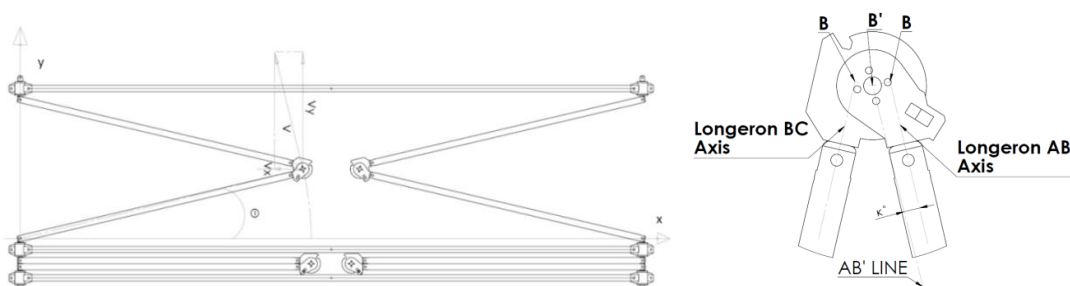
2D Truss geometry and connector's details, (left) 2D Truss geometry actuation velocities, (right) Connection detail: Rotation points
